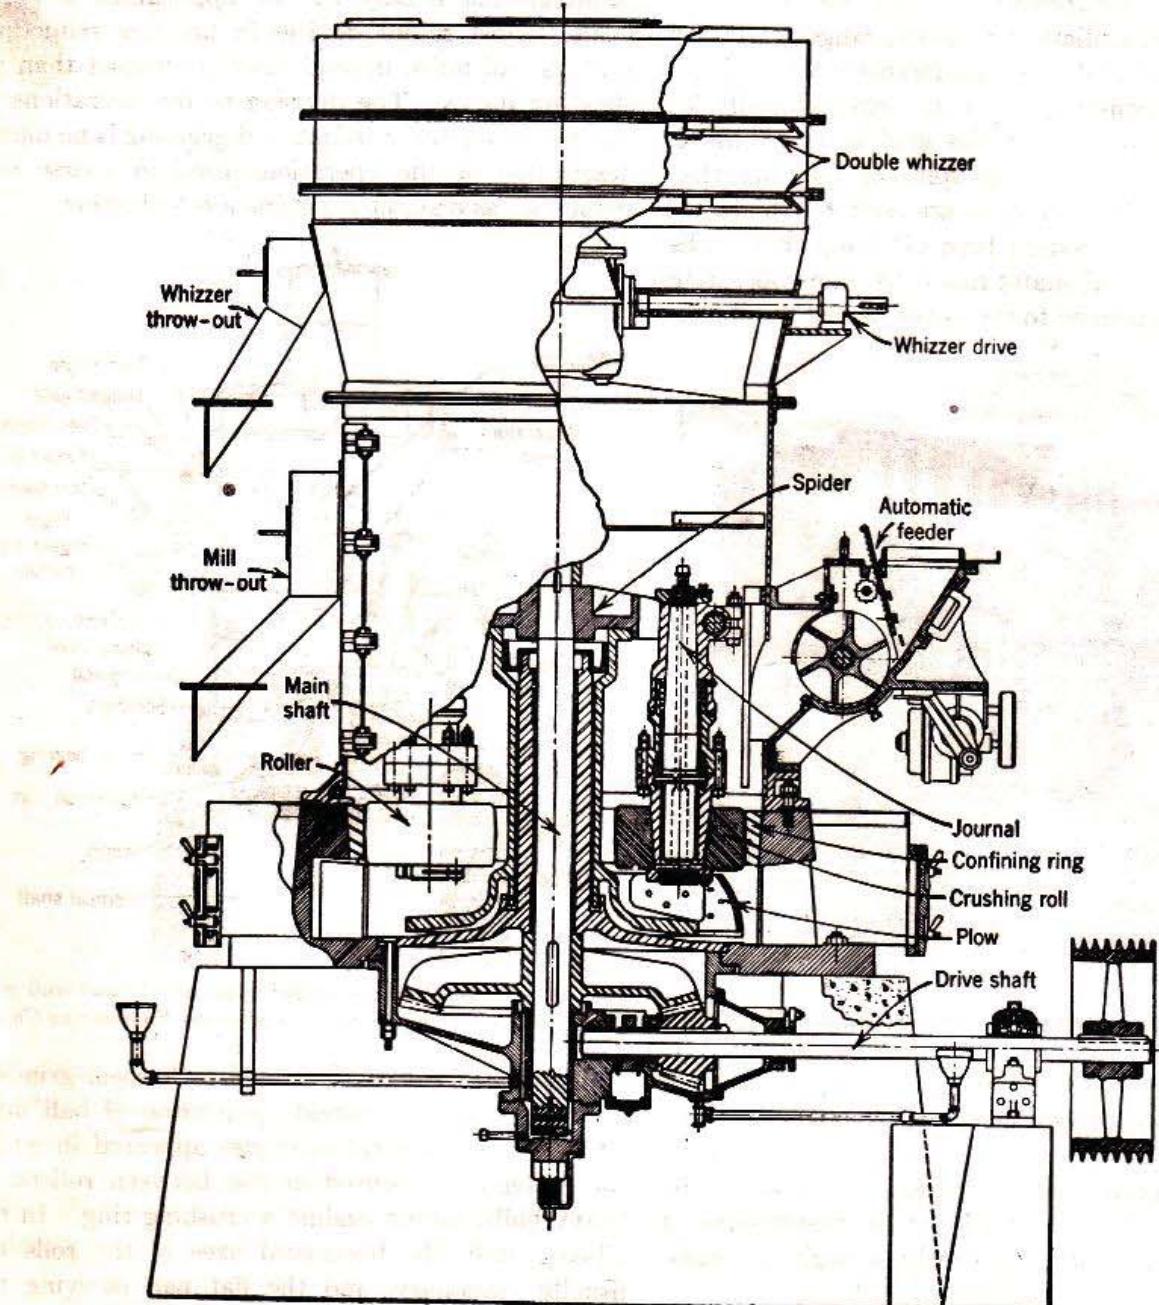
Cutaway and sectional diagram of Raymond roller mill with air classifier or separator. (Combustion Engineering Co.)
